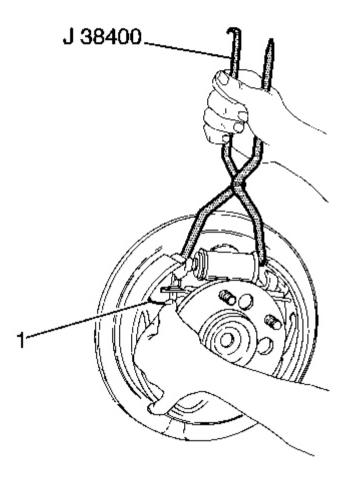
Using J38400 Courtesy of GENERAL MOTORS CORP.
